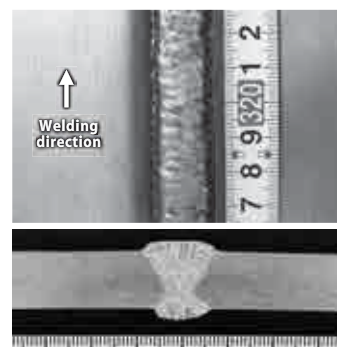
Bead appearance and macro-structure of DW-2594 butt joint
